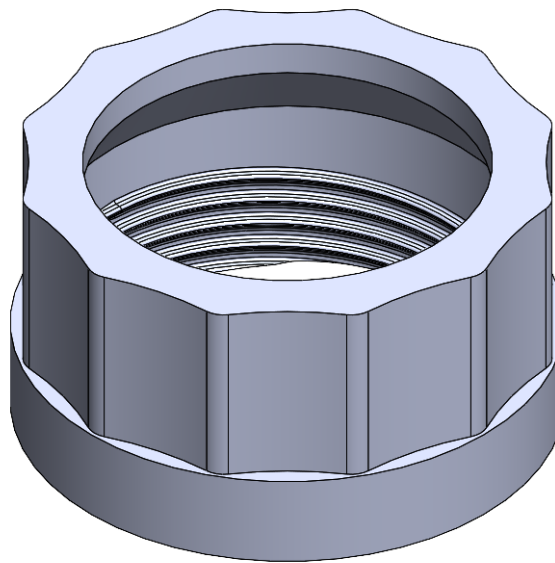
Isometric view of the swivel cap. It can be twisted onto the locking guide (figure 3.6) to lock the module into place. A side view and section view are shown in figure 3.8.
